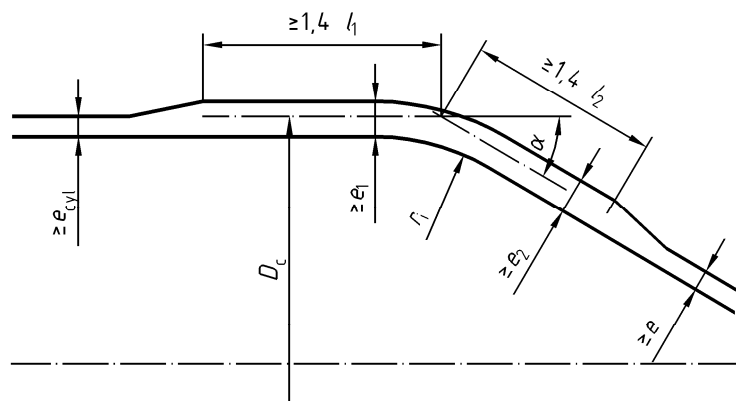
Geometry of cone/cylinder intersection with knuckle – Large end
